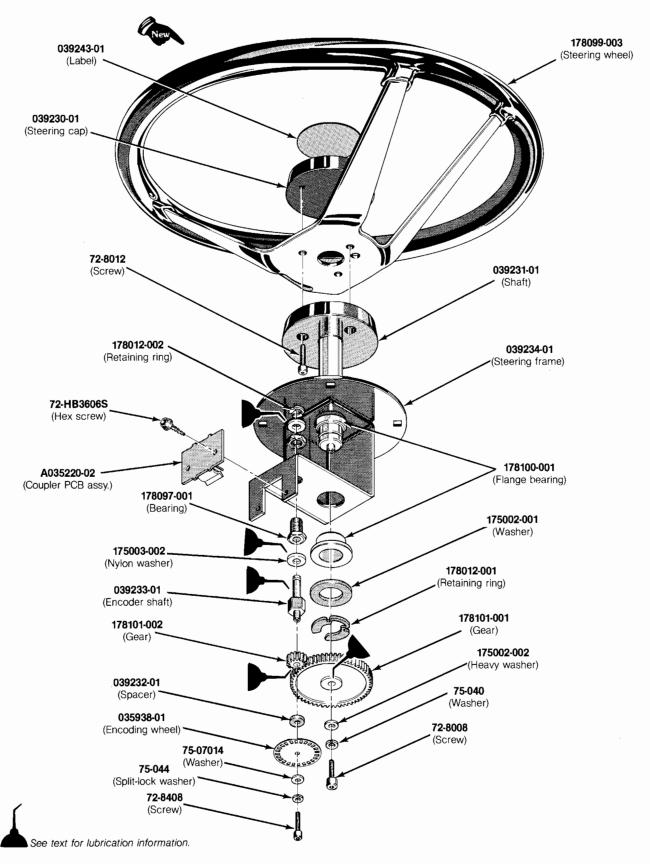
Steering-Wheel Control Assembly A039229-01 D
